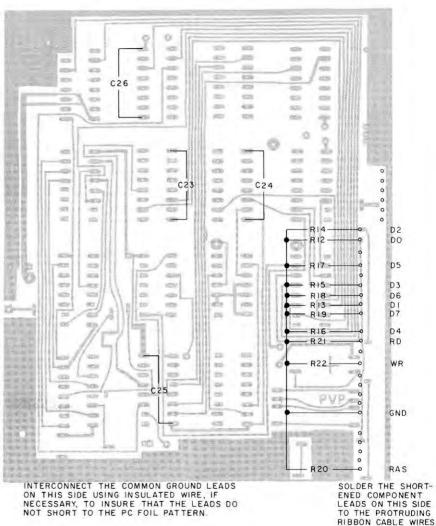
Noise-suppression component placement. Install these after soldering ribbon cable to the other side of the PC board. Intall C23–C26 close to PC board, keeping leads very short.
